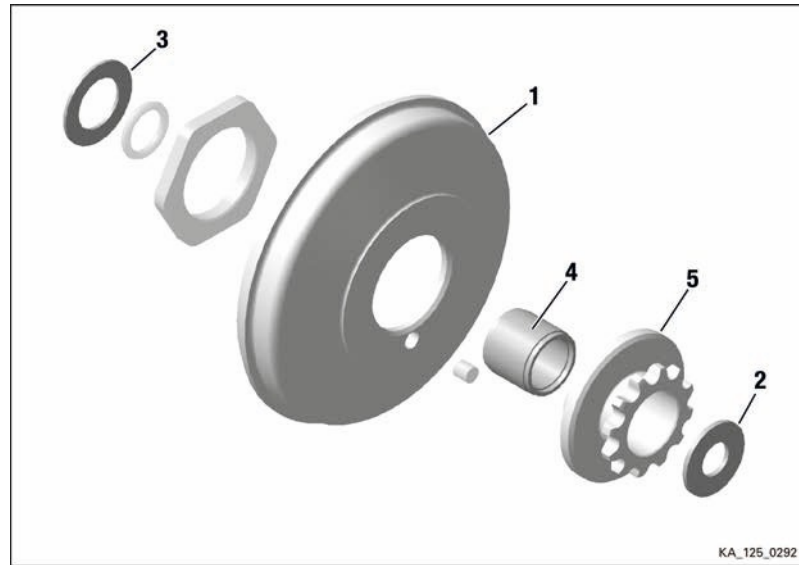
Clutch drum, plain bearing / needle cage, sprocket 離合器鼓, 滑動軸承 / 滾針軸承, 鏈輪
